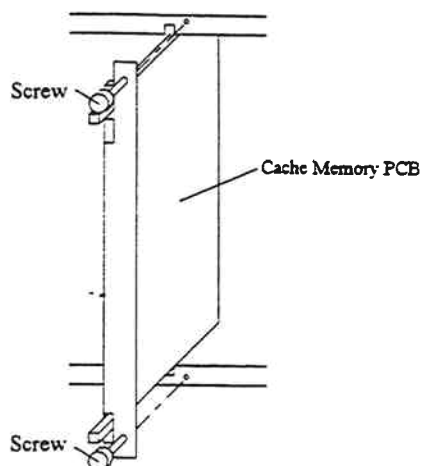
Removal of the Cache Memory PCB
